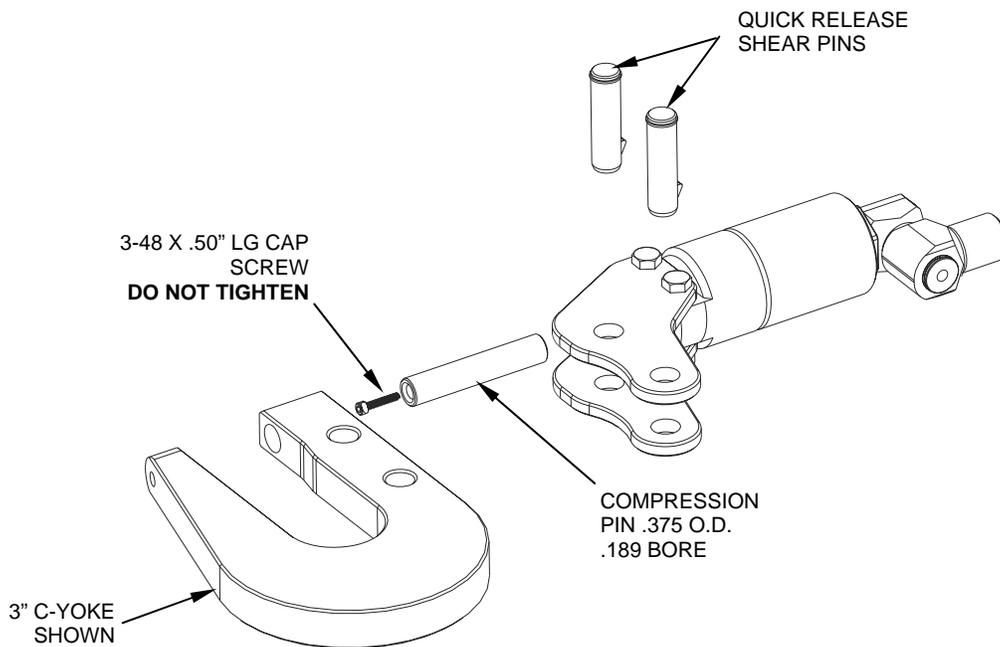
MODEL 3050 C-SQUEEZER YOKE INSTALL
